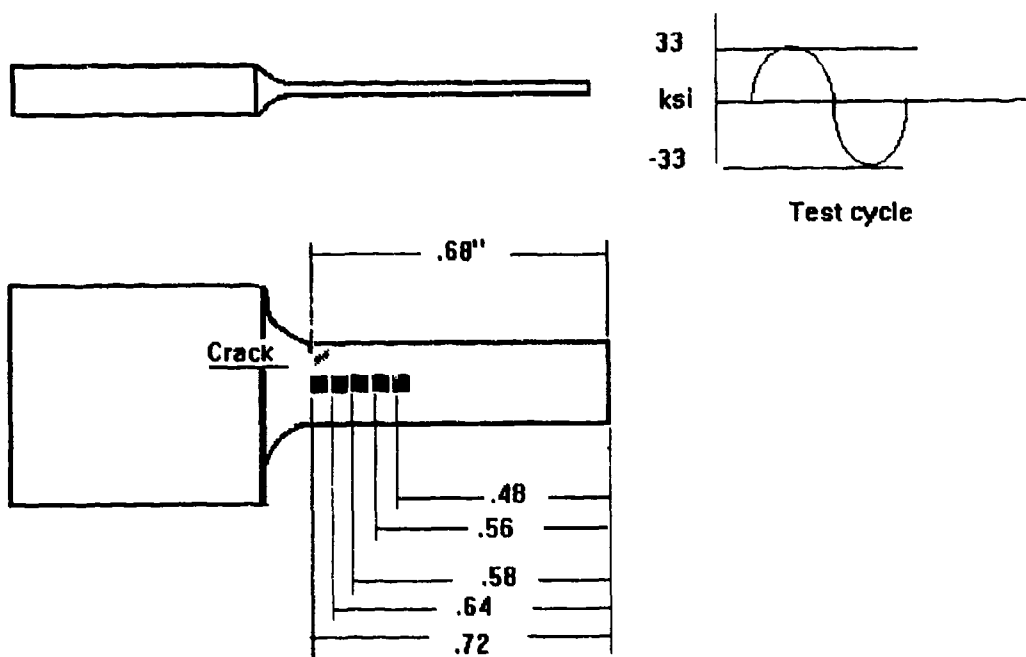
Schematic of test specimen and gage location on vibratory threshold test specimen.
